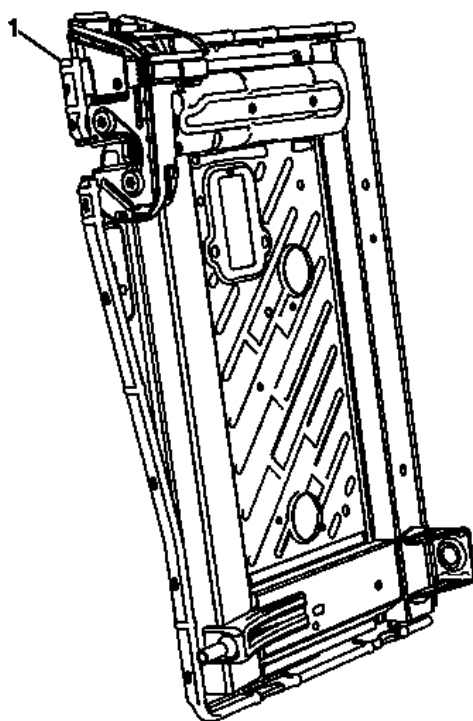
Rear Seat Back Cushion Panel (40% Side)
